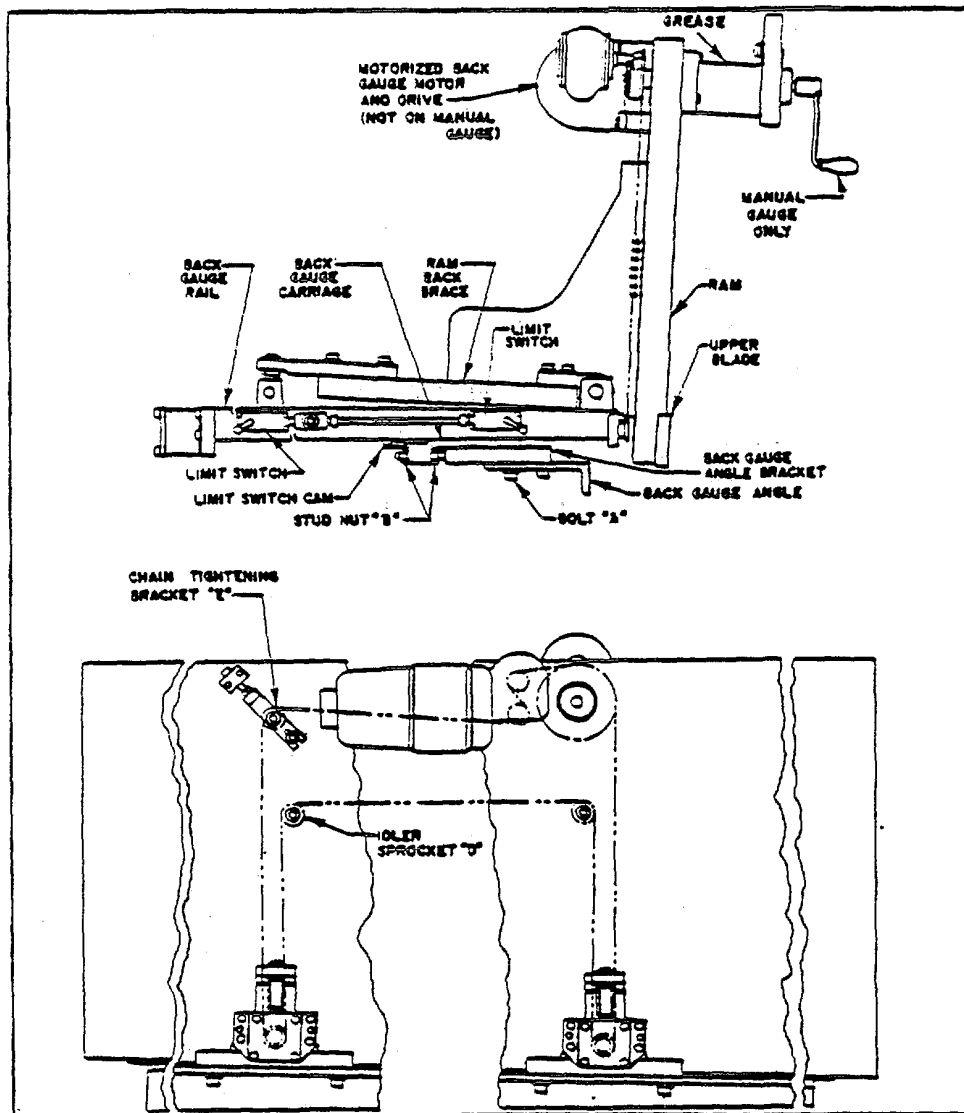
Back Gauge Angle - Adjustment for Parallelism
